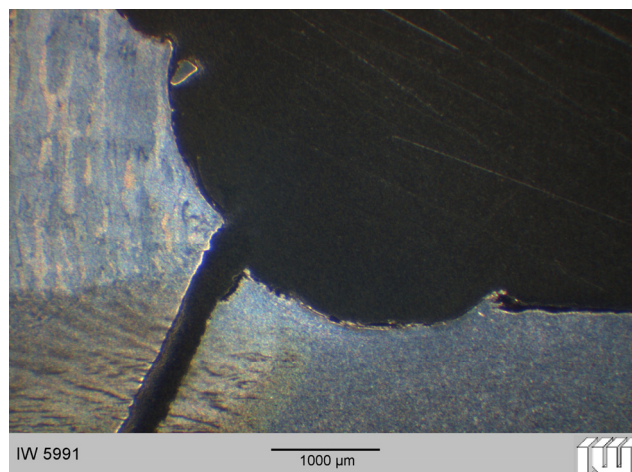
UIT-treated Weld Toe of Y\_9 with Fatigue Crack
